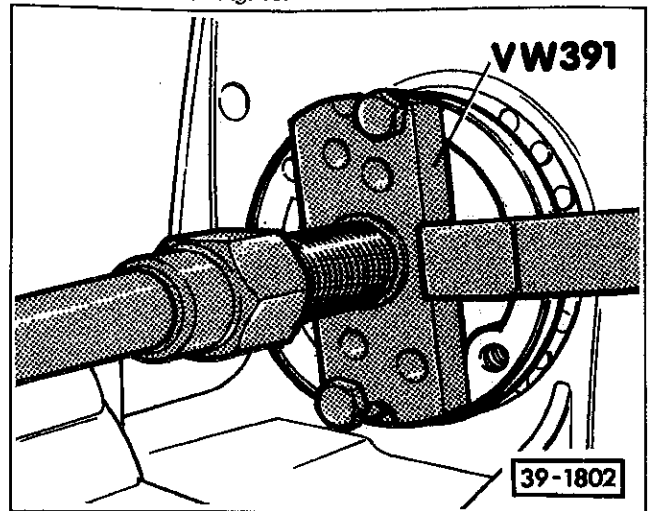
VW special tool no. VW391 being used to press drive flange off axle shaft.
